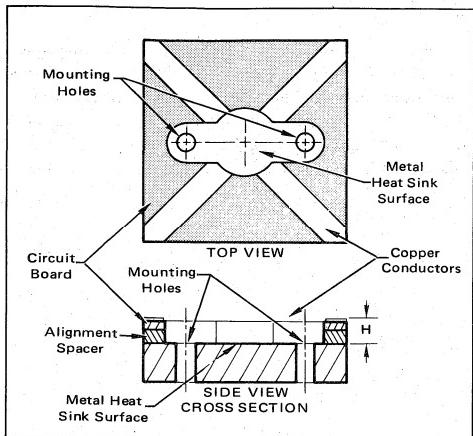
Flange Type SOE Transistor Mounting Method
